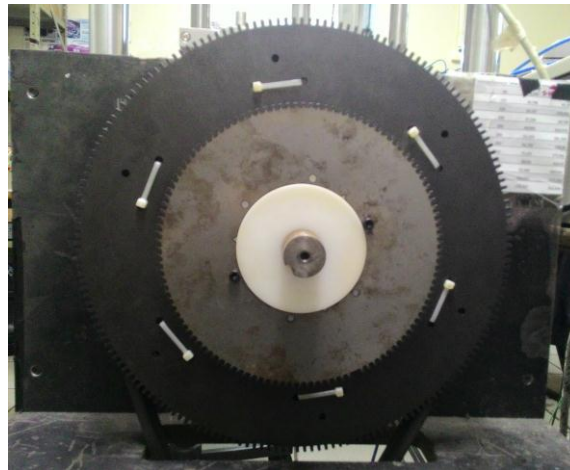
The 120 and 180 teeth tooth gear installed on the shaft.
